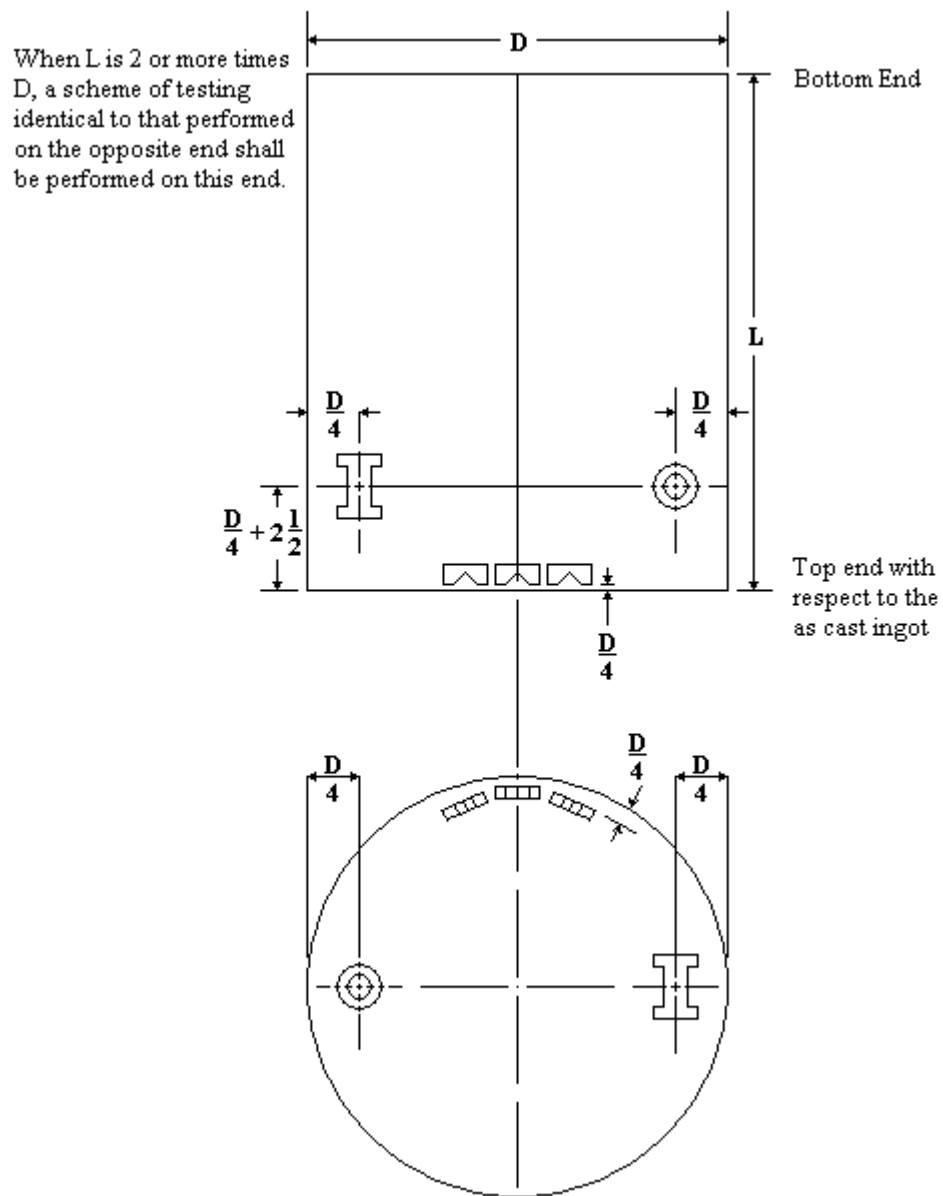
Typical Schematic Diagram of Test Specimen Location for 12-Inch Thick Forgings of Solid Circular Cross-Section. (See C.4.4.2.2 for details on test specimen location.)
